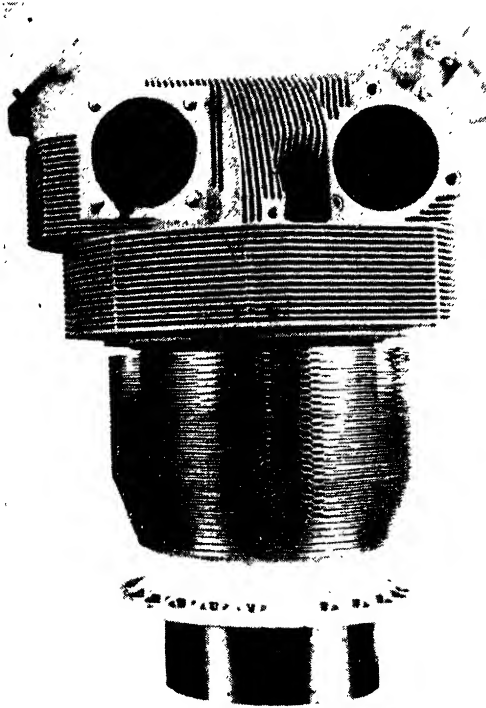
Modern aircooled cylinder. Head is made from an aluminum forging, machined all over, including the fins. Barrel is a steel forging with sheet-aluminum fins attached by a special rolling process. (Wright Aeronautical Corporation.)
